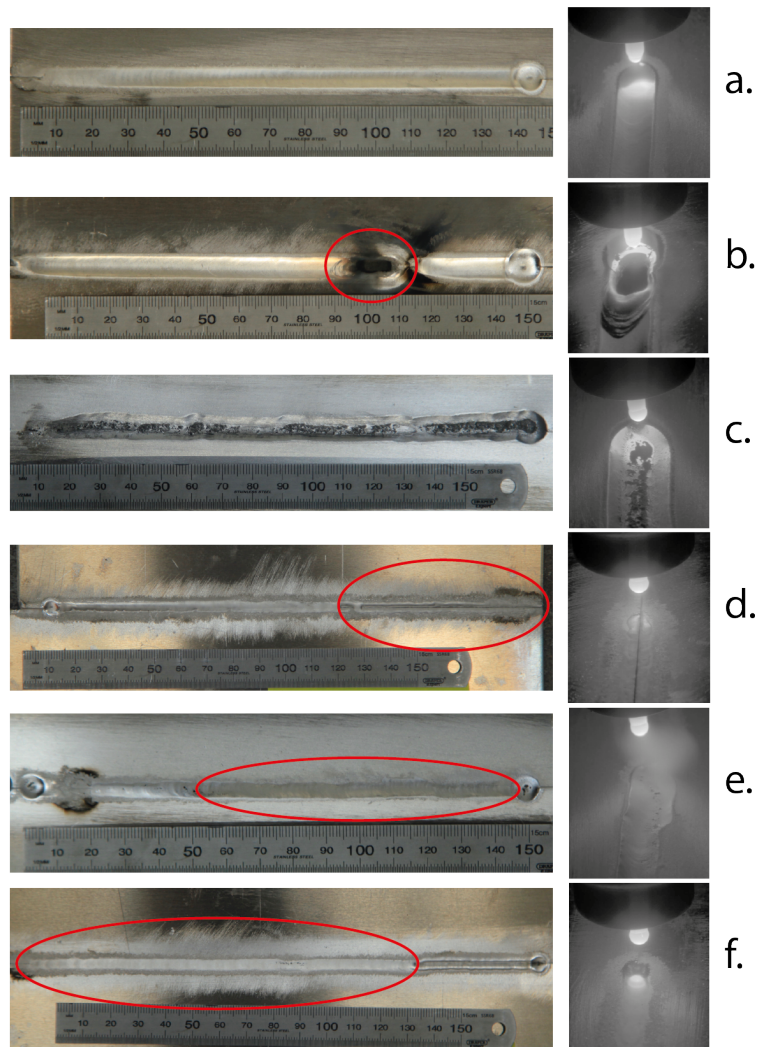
Dataset samples of aluminium TIG welding. a) good weld; b) burn through; c) contamination; d) lack of fusion; e) misalignment; f) lack of penetration
